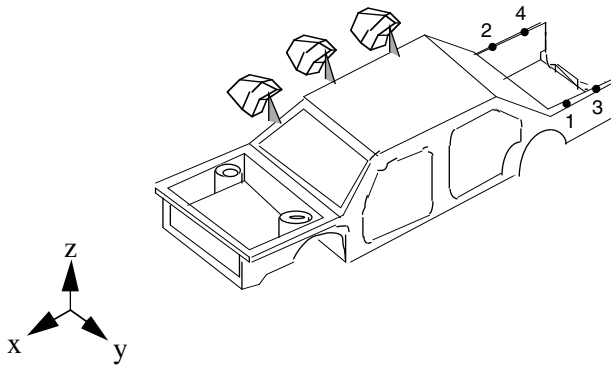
A schematic of an optical coordinate measuring machine checking body dimensions.
